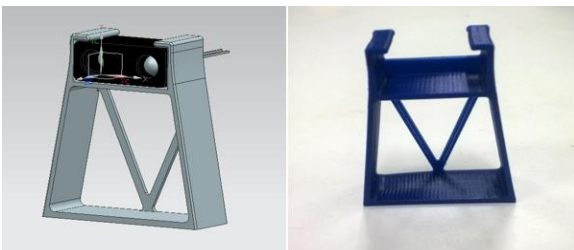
Computer rendering horizontal testing stand with sensor and 3D printed testing stand
